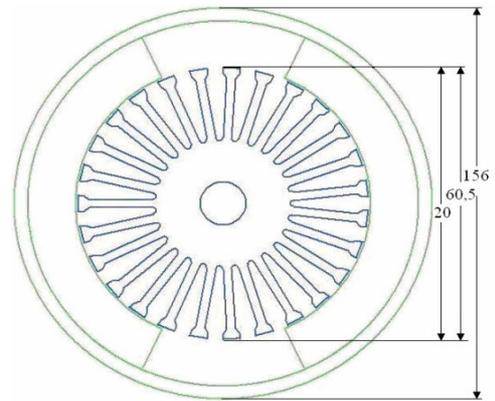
Iron sheet package view of brushed DC motor with 1.5 kW, 150 rpm permanent magnet
